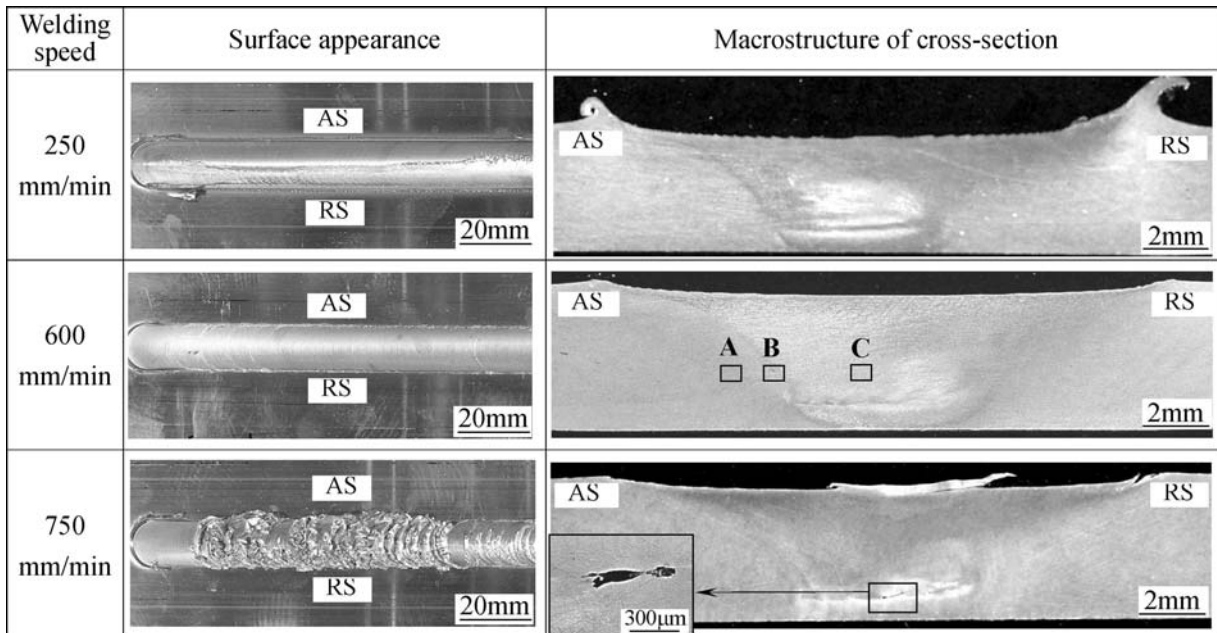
Surface appearances and cross-sectional macrostructures of FS welded joints of roll compaction processed AZ31B at various welding speeds.
